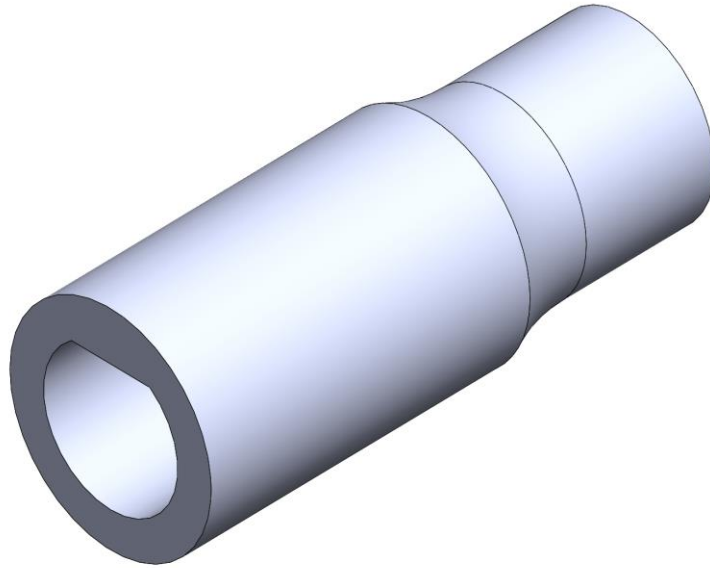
Motor connector, showing the cutout for the motor axle.
